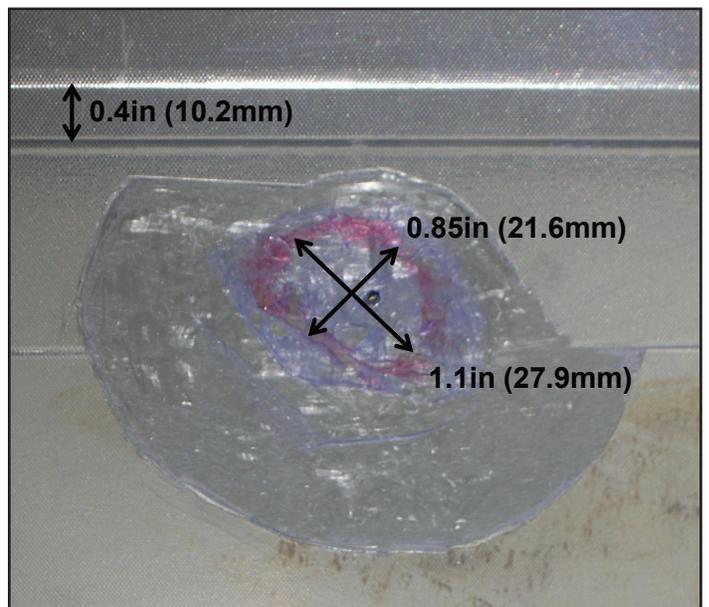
Front facesheet with thermal tape removed. Extent of damaged facesheet is highlighted.
